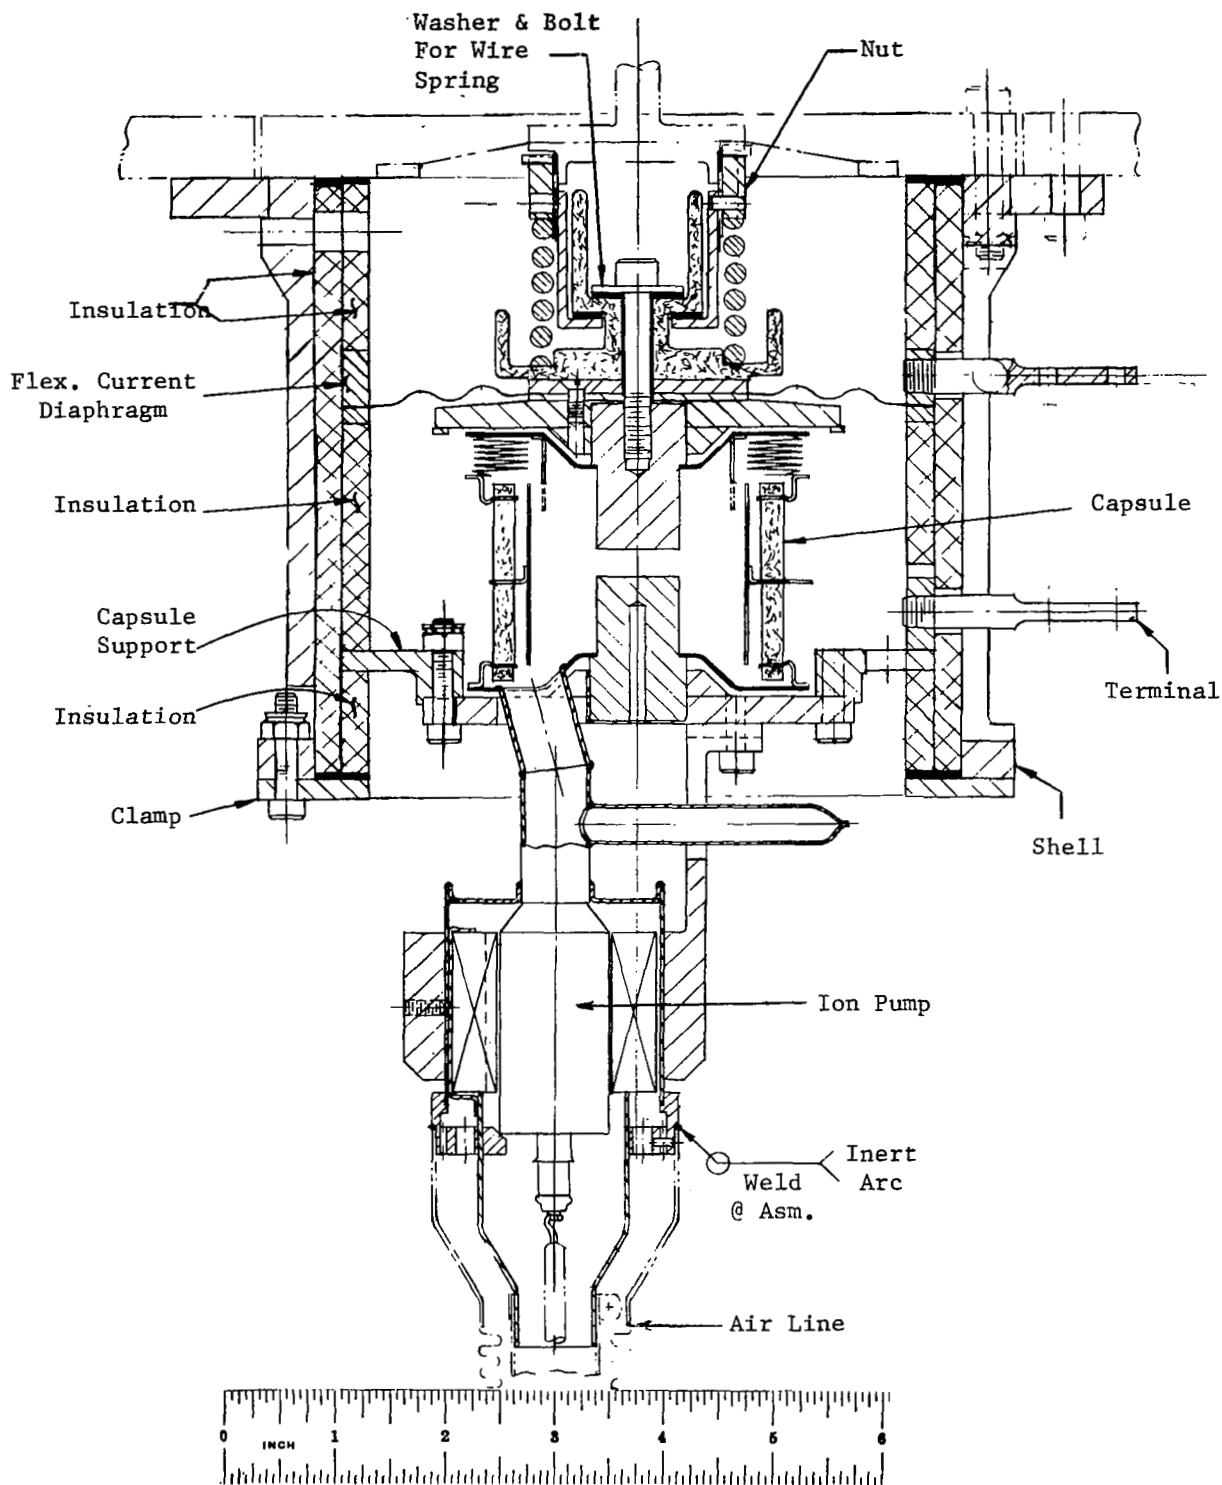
Layout of Vacuum Interrupter for DC Contactor.
